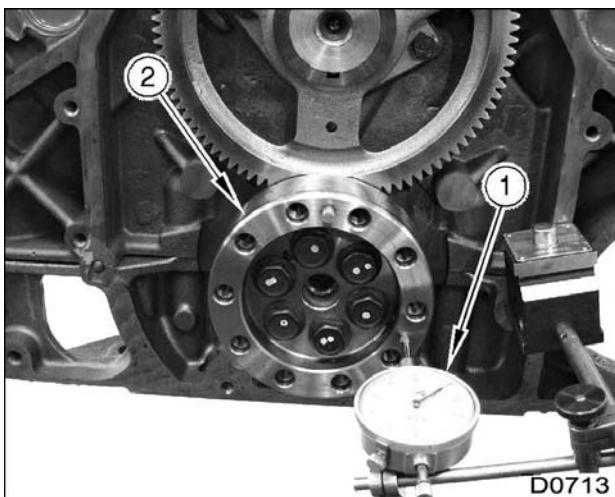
Gear backlash check (camshaft gear to crankshaft gear)
